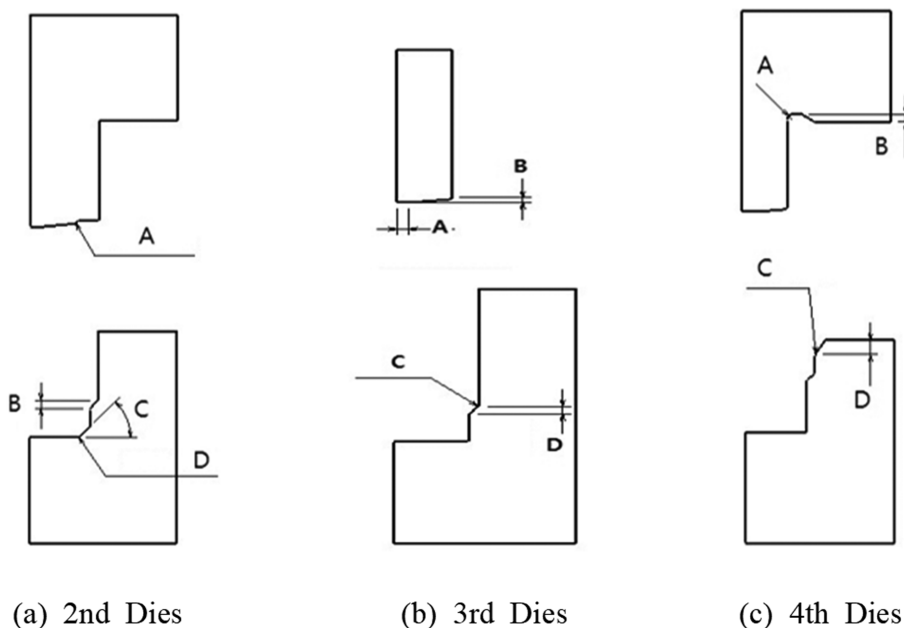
Design parameters of 2nd, 3rd, 4th dies sets for cold forging.
